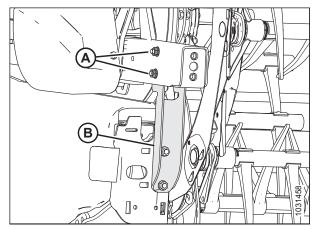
Outboard Reel Arm Support – D1XL Header Shown
